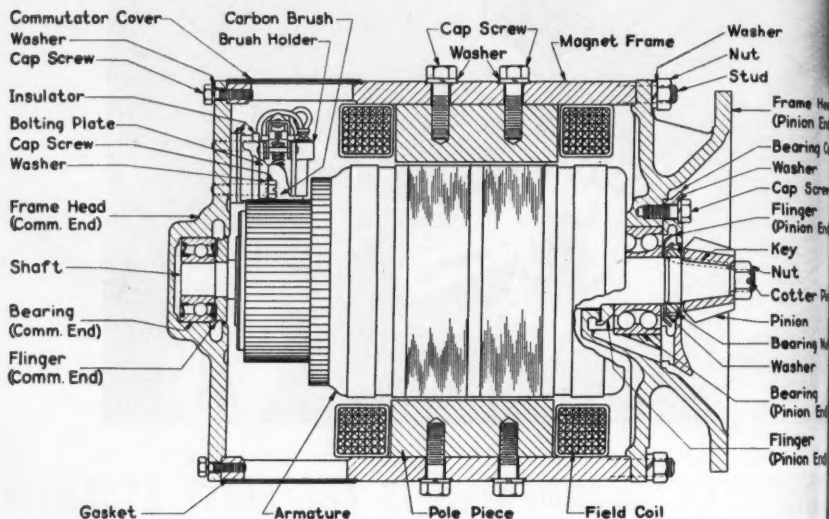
SECTIONAL VIEW GE-1226-A MOTOR.
